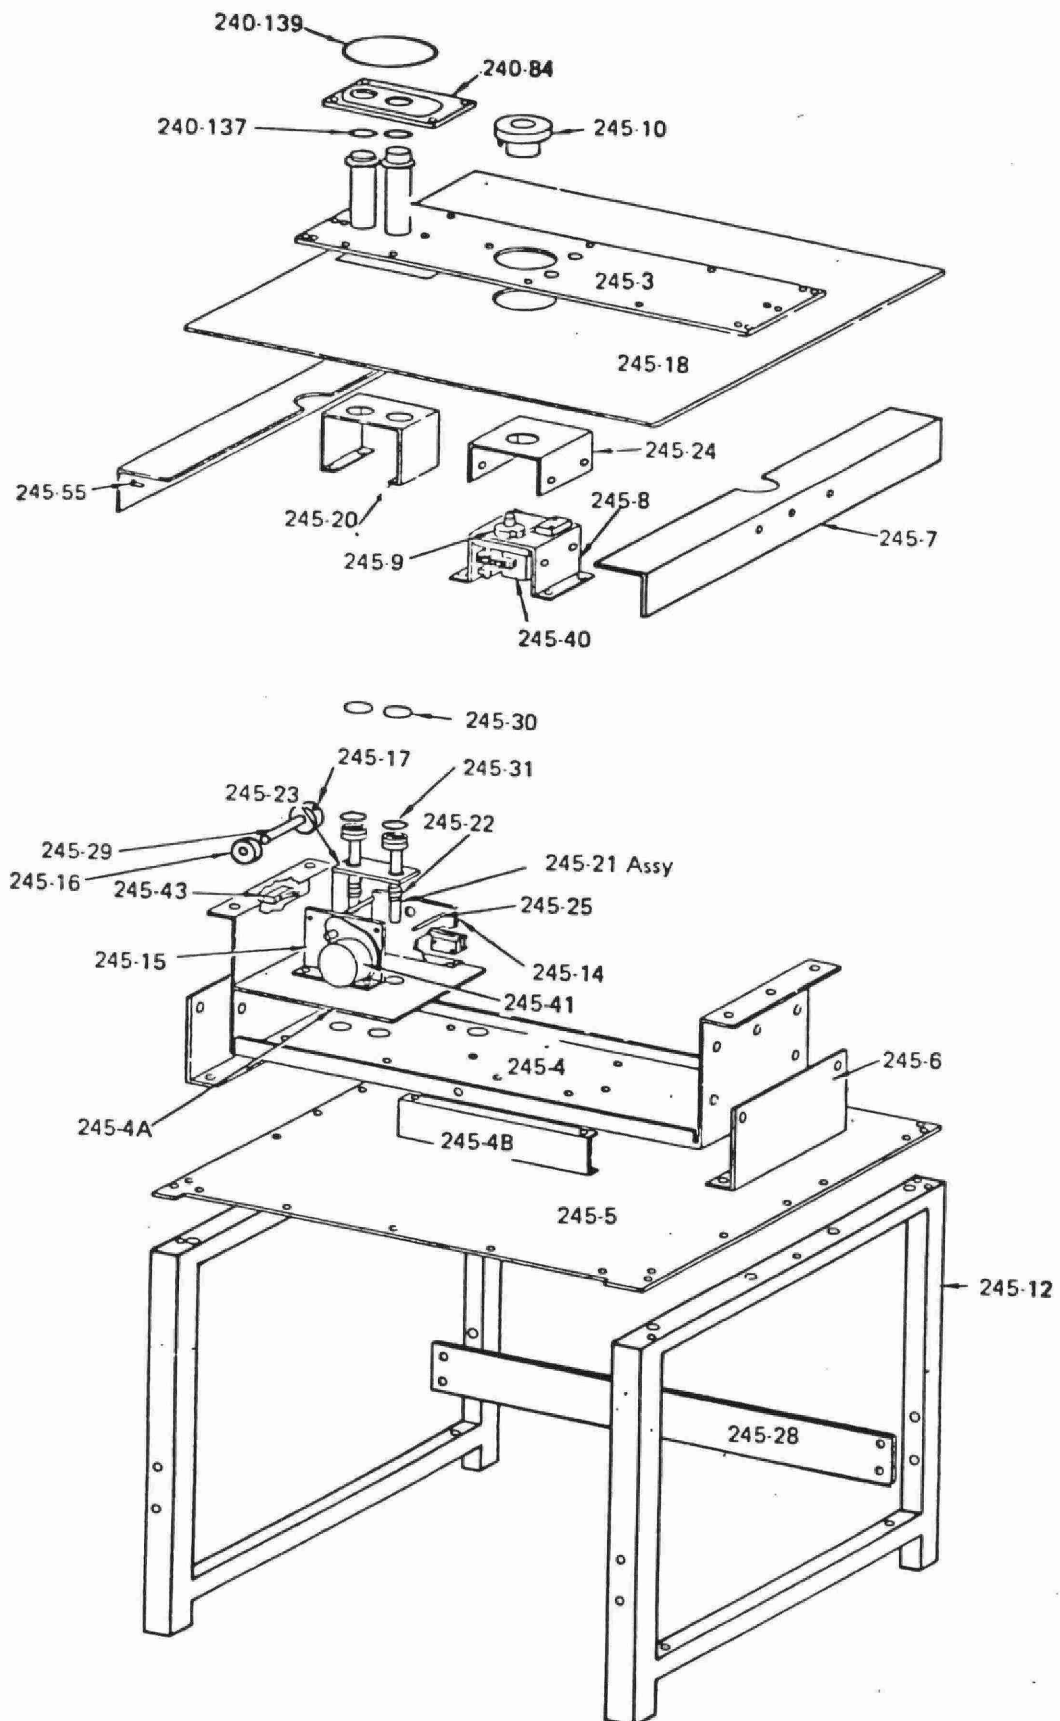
Model 245 Virtual Impactor Sampling Module Assembly.
